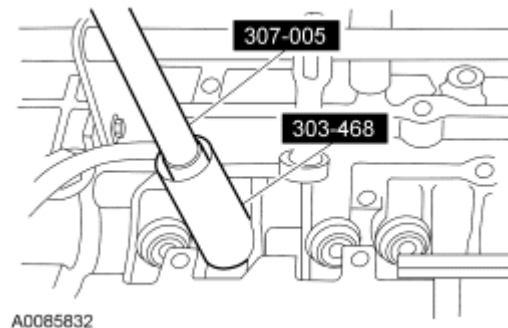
Removing Valve Seal Using Special Tools (307-005, 303-468)
